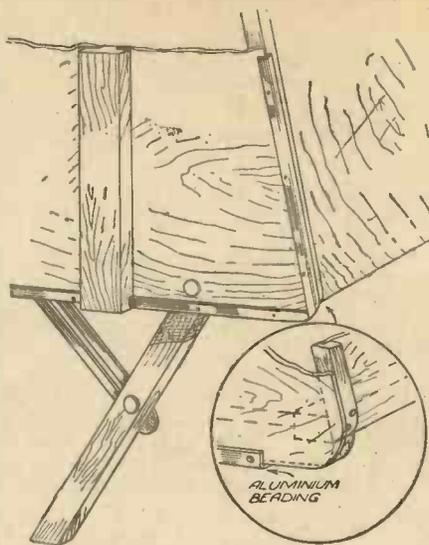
Fitting of the aluminium angle beading and the rear body stay.
